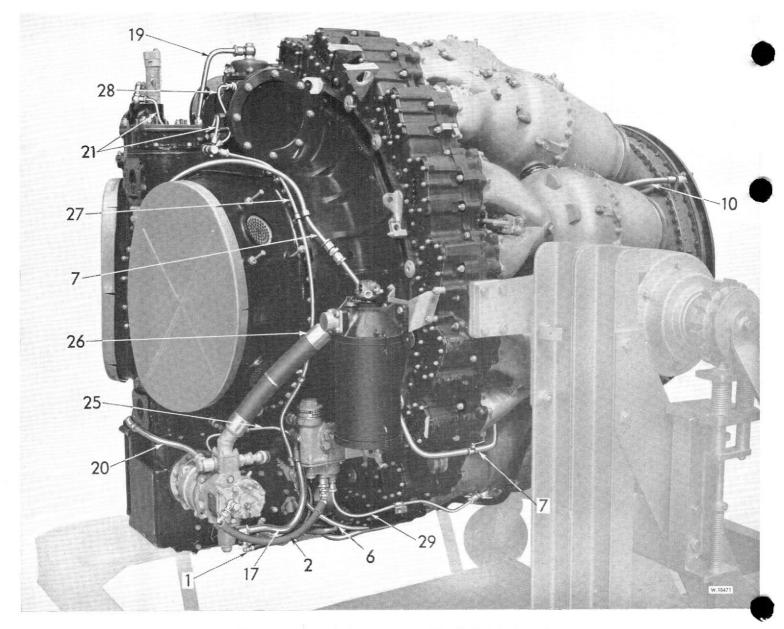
Disposition of pipes on port side of 48 Mk. 2 engine.
